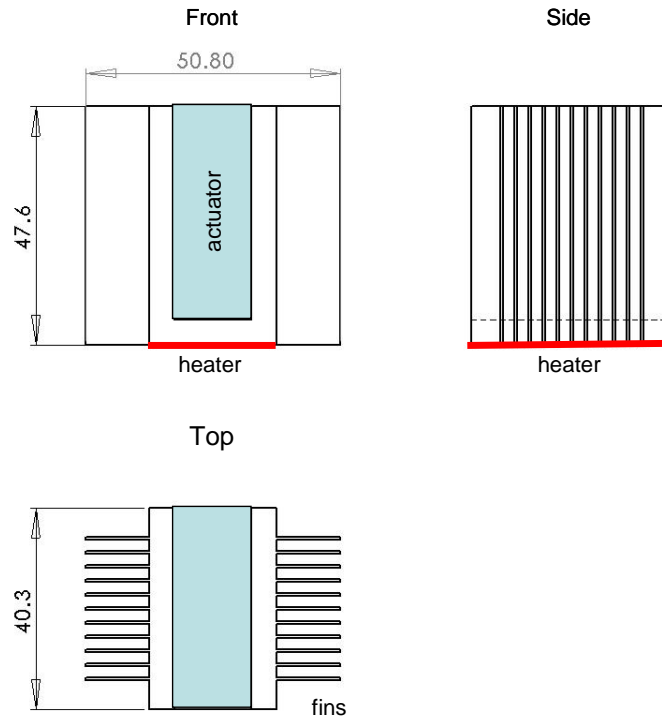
Front, side and top views of heat sink with locations of heater and actuator driver shown
